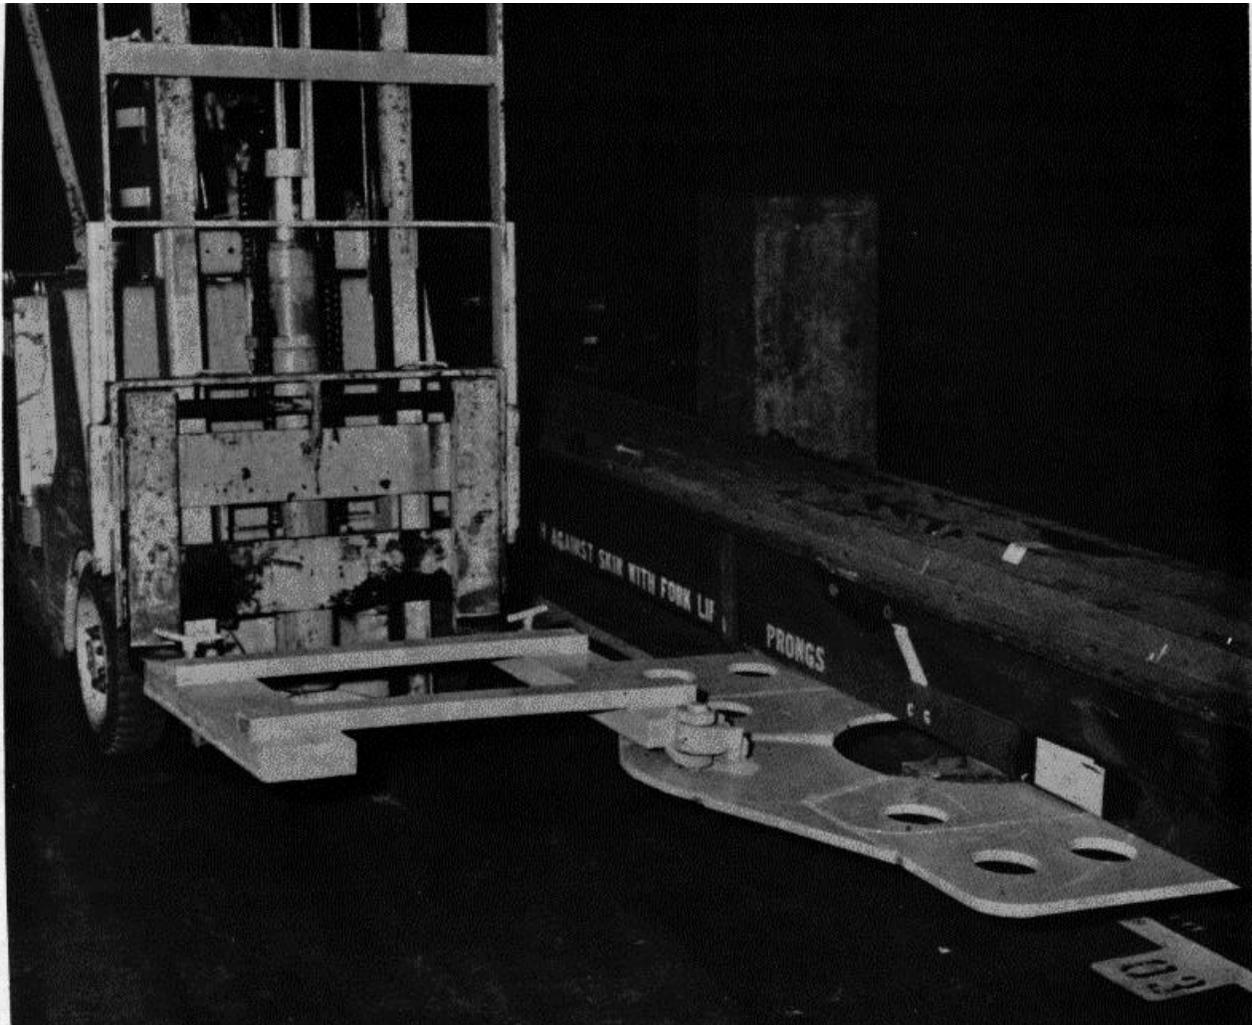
Pivoting carrying platform for handling long items longitudinally.
